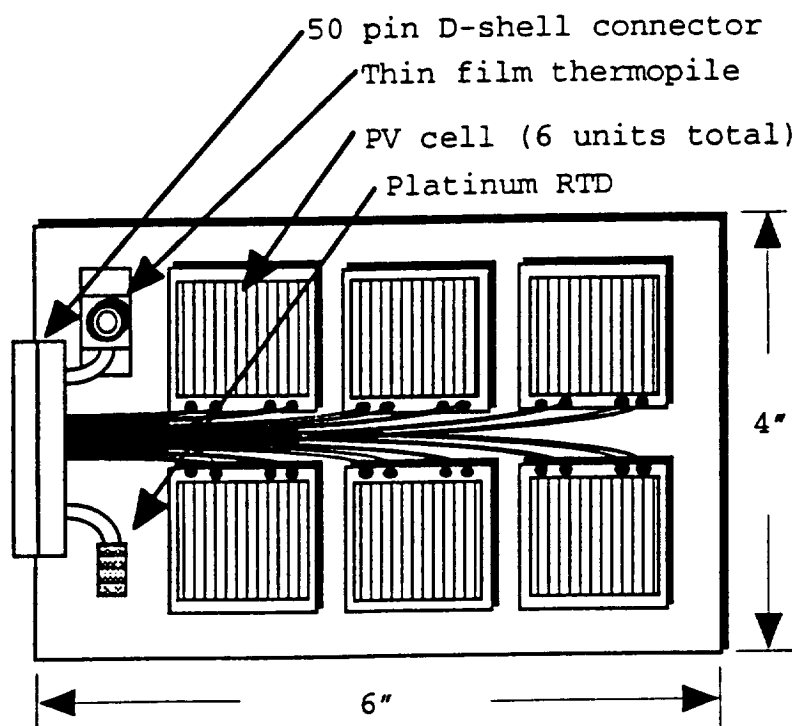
Cell mounting plate assembly (mounted on trailing edge of wing)
